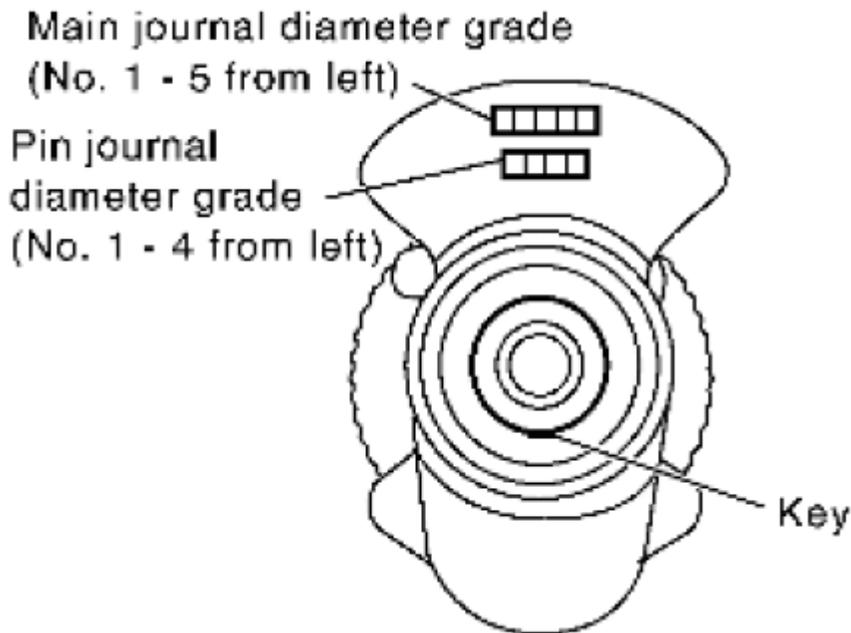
Identifying Crankshaft Pin Journal Diameter Grade And Main Journal Diameter Grade
